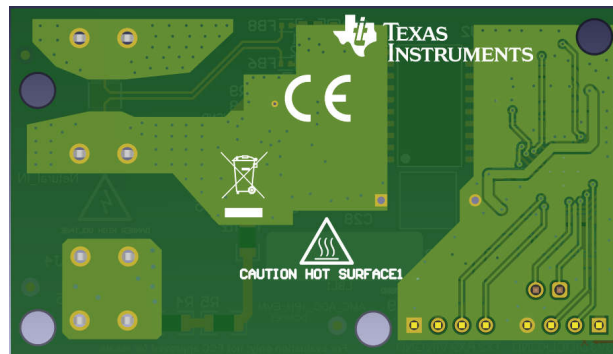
AMC-ADC-1PH-EVM Bottom PCB Drawing
